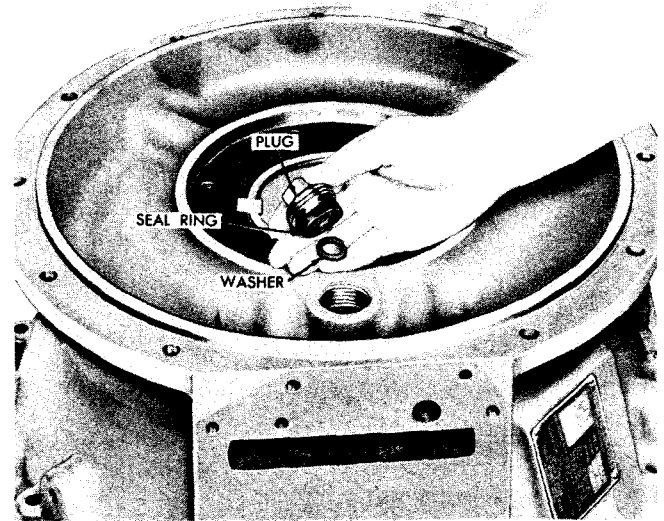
Removing (or installing) square-head plug, seal ring and lock washer from converter housing
